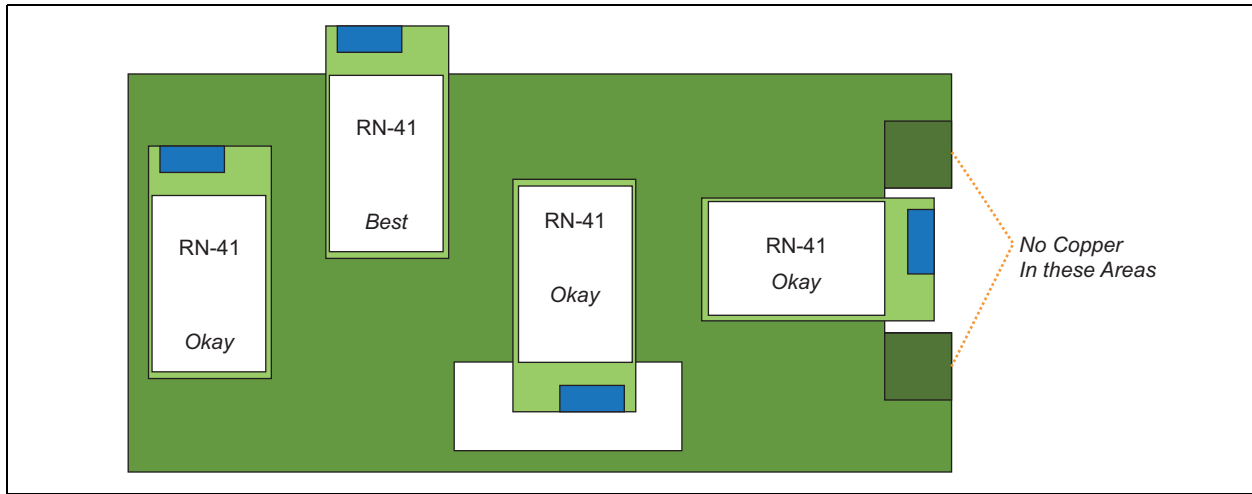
RN-41 HOST PCB EXAMPLE LAYOUT
